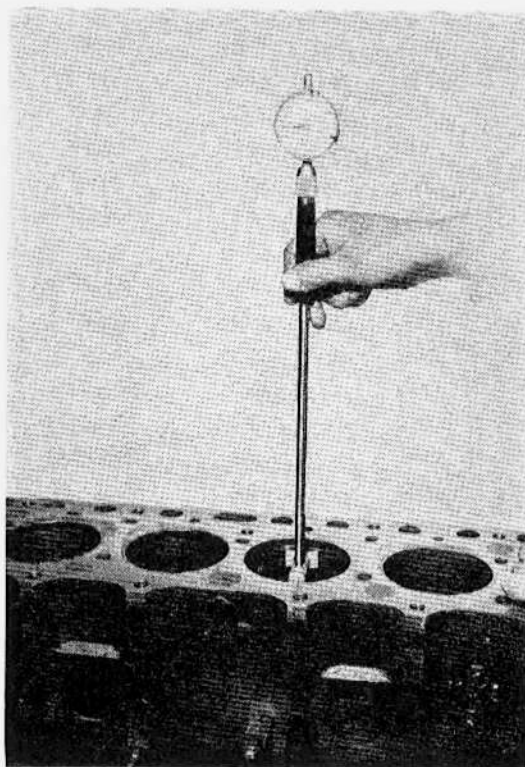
Checking Cylinder Bore with Inside Dial Gage
